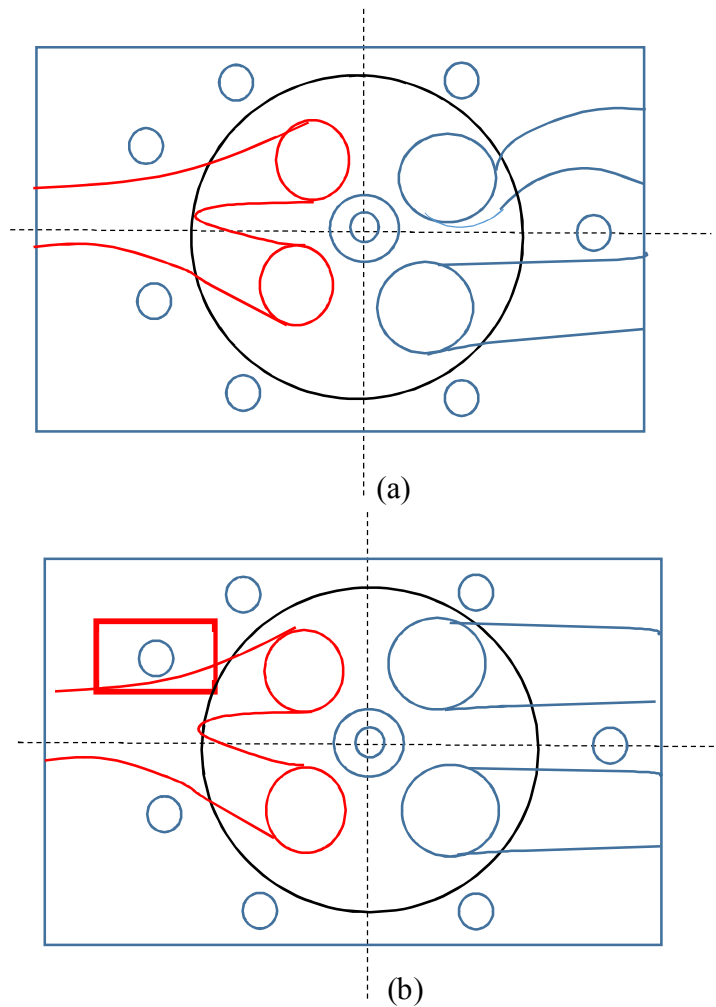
(a) shows existing model of cylinder head and in (b) highlighted section shows position of upper end bolt position too close to exhaust port in new cylinder head model by retaining the same existing model of exhaust port
